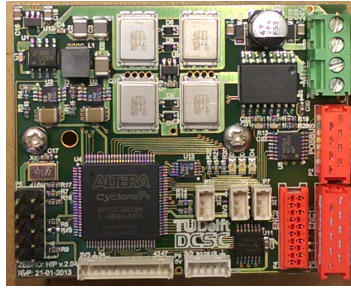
Picture of the Hip motorcontroller board developed at DCSC
